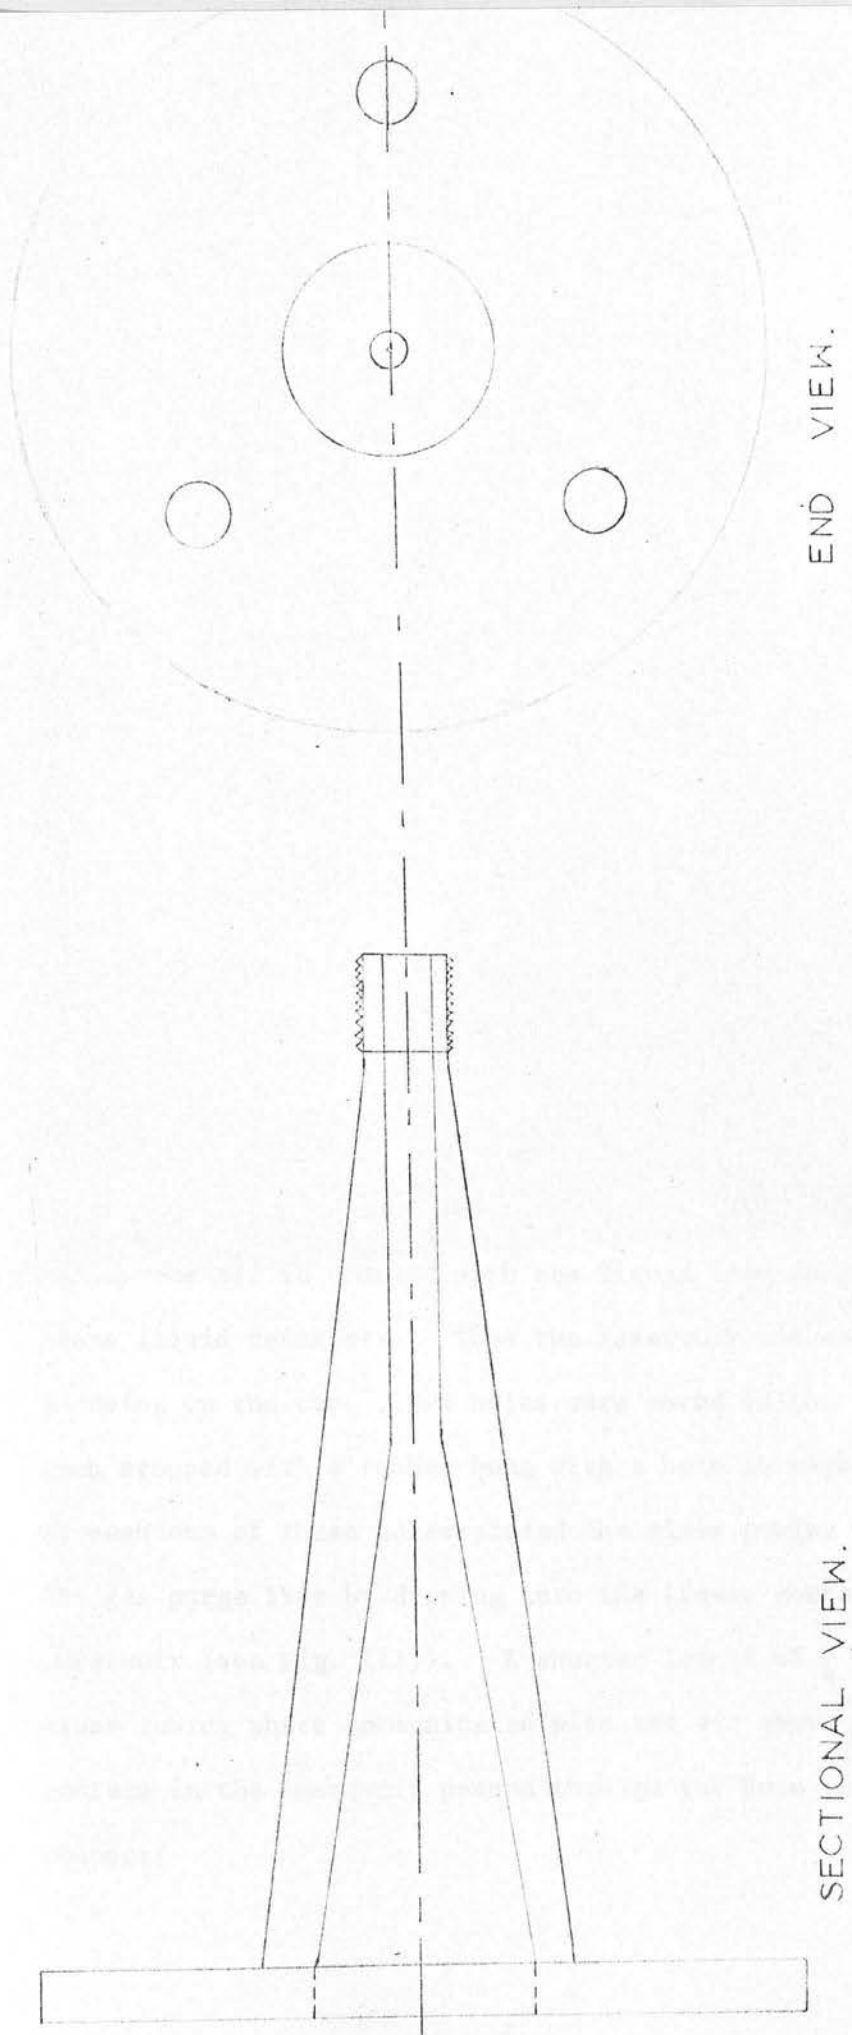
STAINLESS STEEL ADAPTOR SECTION
